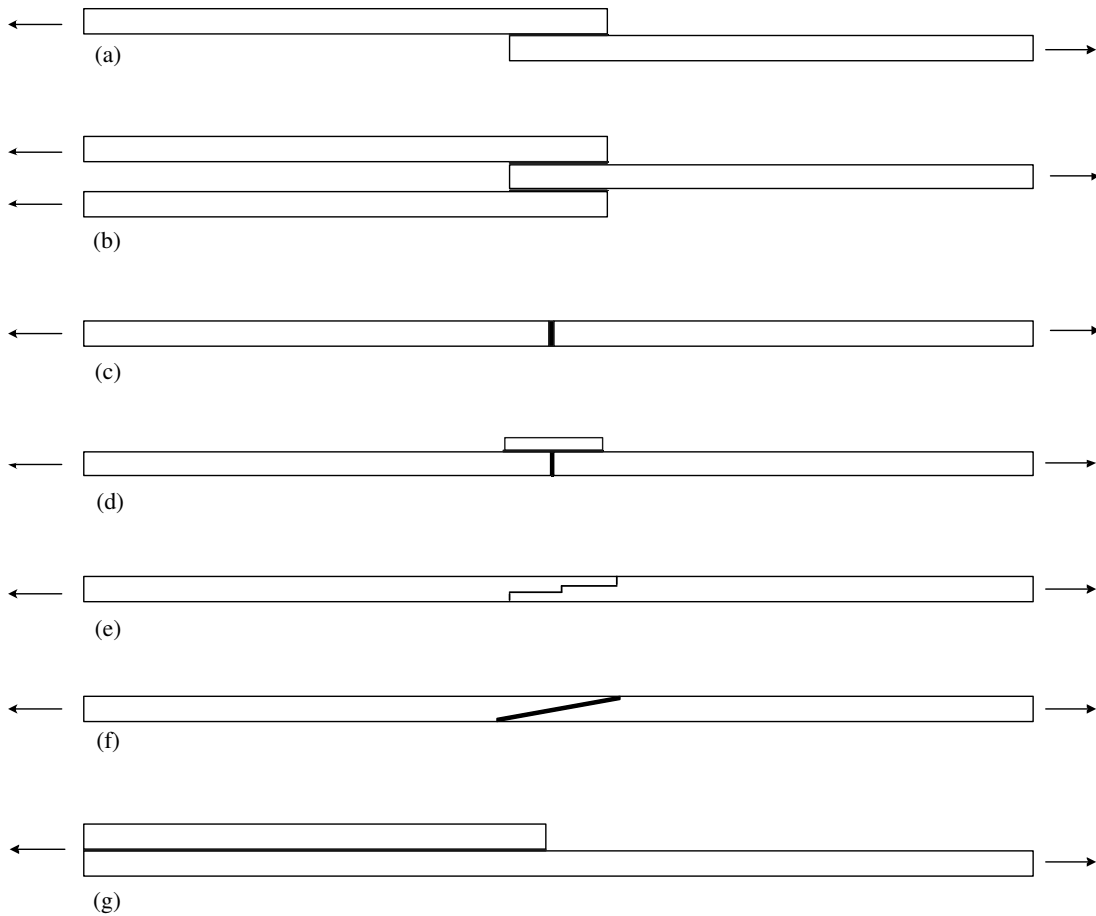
Commonly employed structural bonded joints configuration, (a) Single lap joint, (b) double lap joint, (c) Butt joint, (d) Butt strap joint, (e) Step joint, (f) Single scarf joint, and (g) Lap shear joint.
